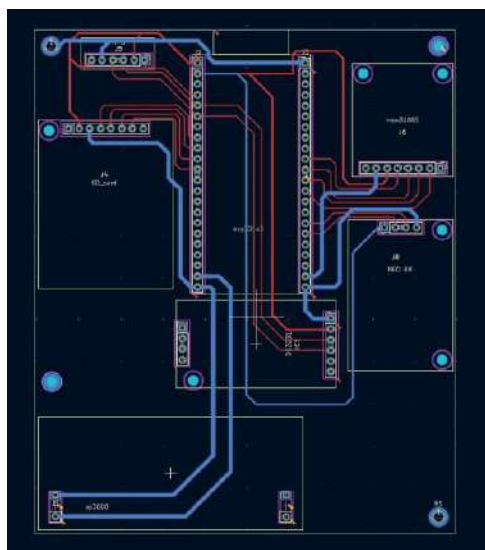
PCB trace layout of the monitoring circuit, designed in KiCad.
